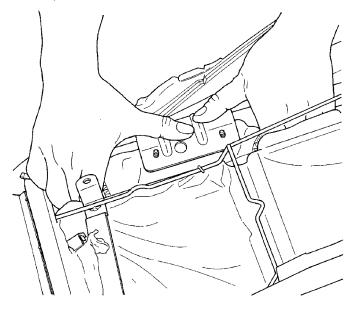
INSTALLING SIDE AIRBAG INTO SEAT BACK
